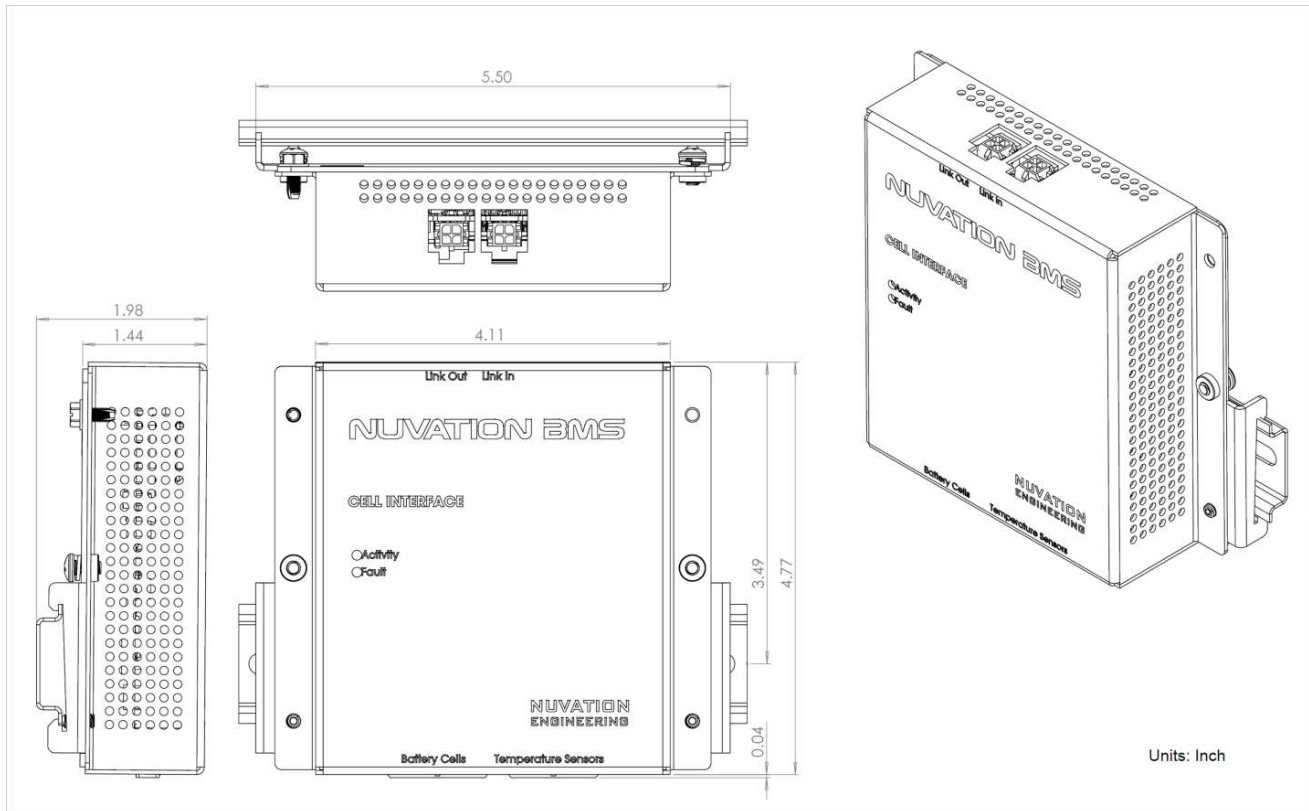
Mechanical Drawing of Cell Interface with Cell Interface Mounting Bracket (Bulkhead-to-DIN)
